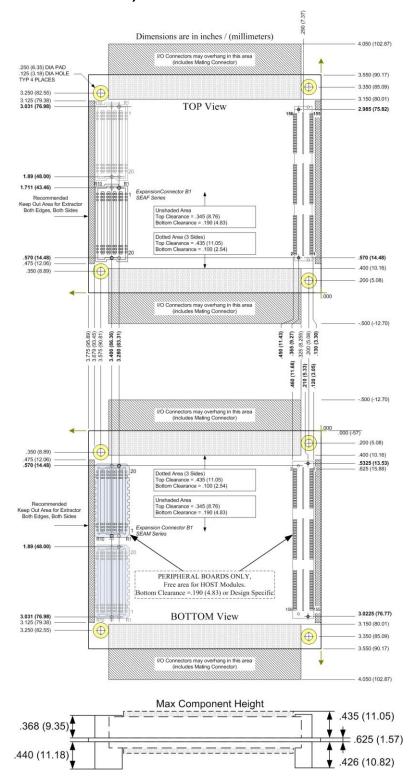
StackPC-FPE Module Dimensions (PC/104 adopted)
